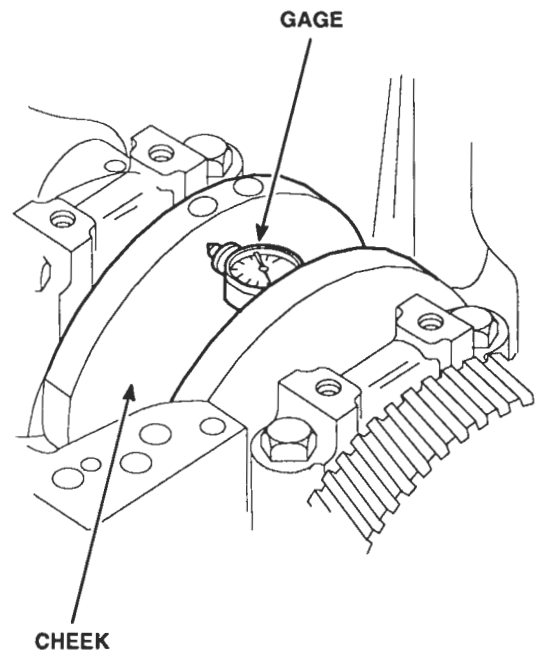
Crankshaft Distortion Measuring Gage Mounted on Crankshaft
